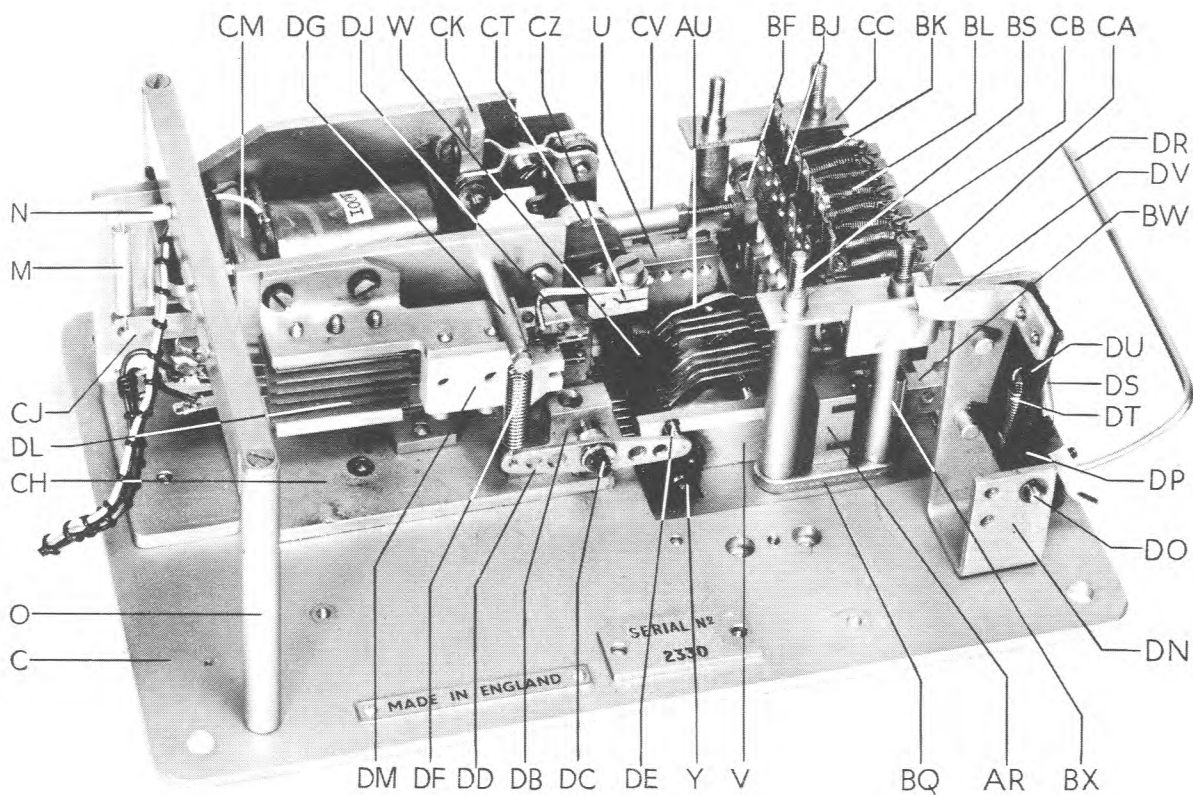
TAPE READER (PARTIAL ASSEMBLY)
